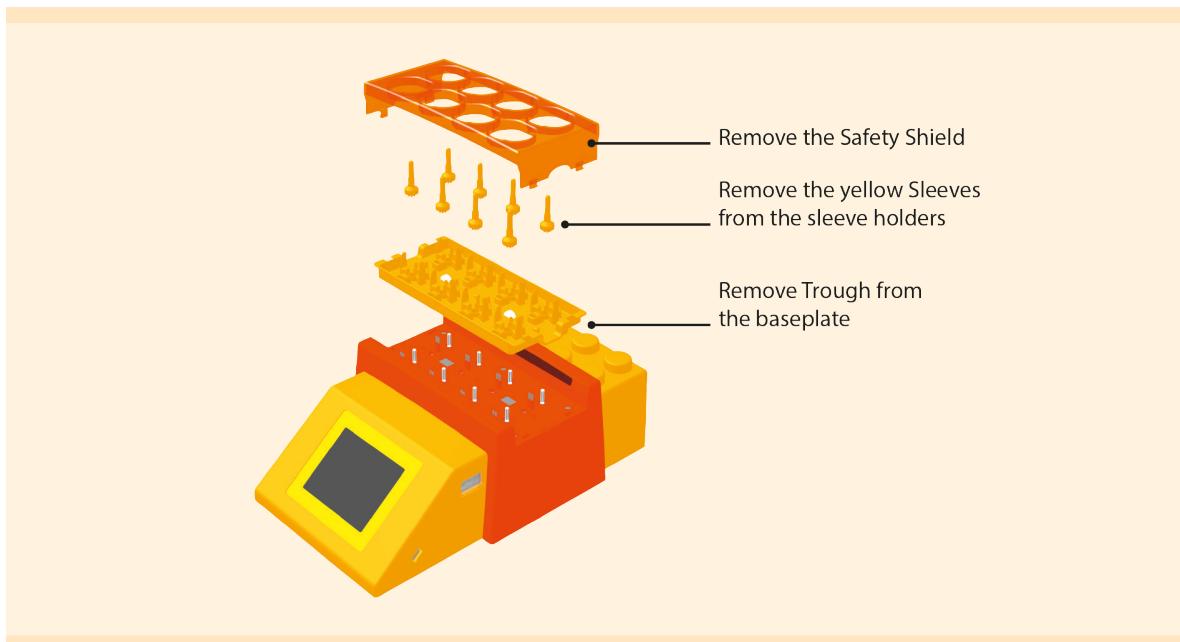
Disassembly of the gentleMACS Octo with Heaters for cleaning.
